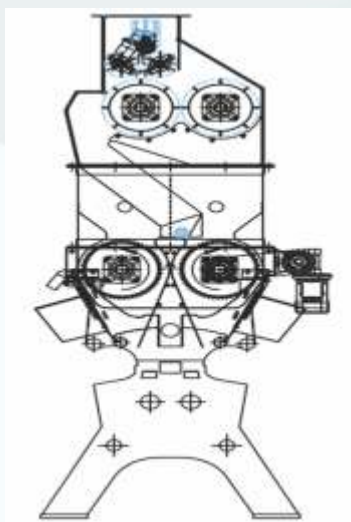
Single Locking Cotton Feeder for Double Roller (DR) Gin
